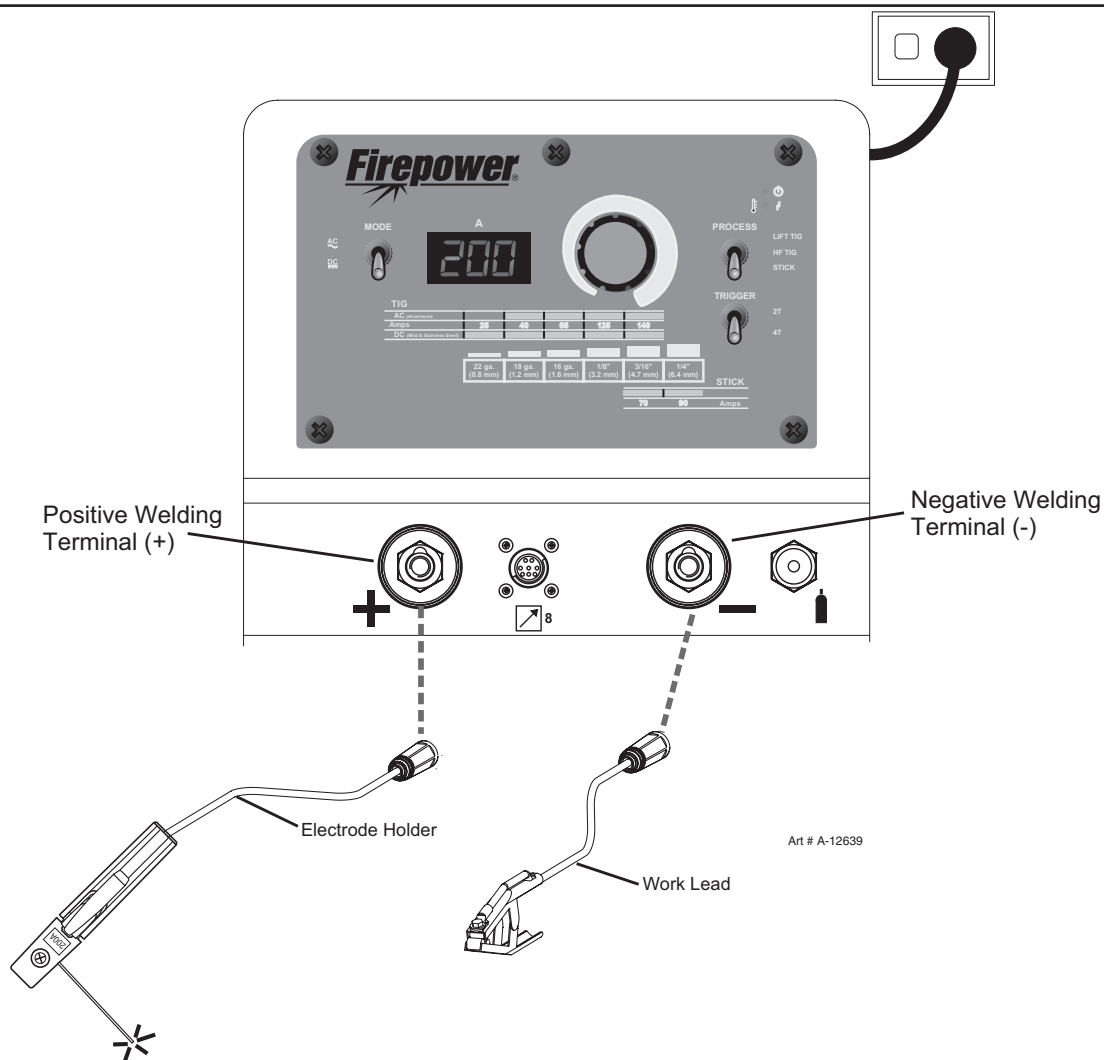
Setup for Stick Welding.(SMAW)
